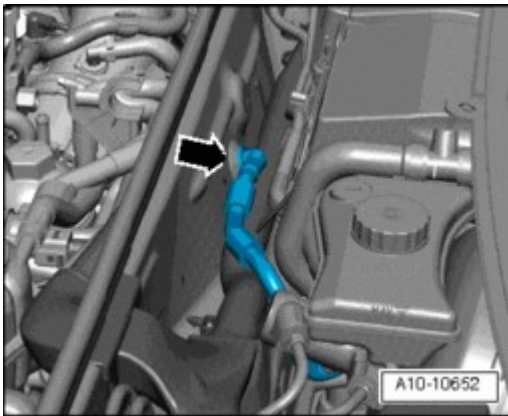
Disconnecting Vacuum Line To Brake Booster At Bulkhead
